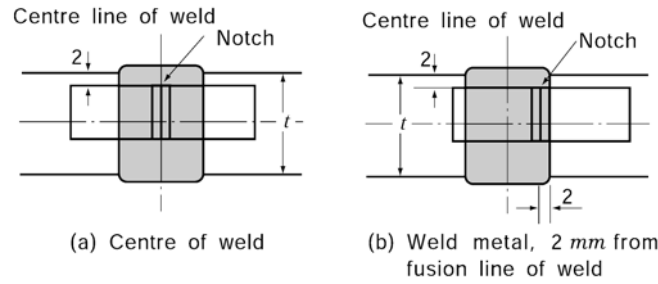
Position of Impact Specimen (Unit : mm, t = Plate thickness)
